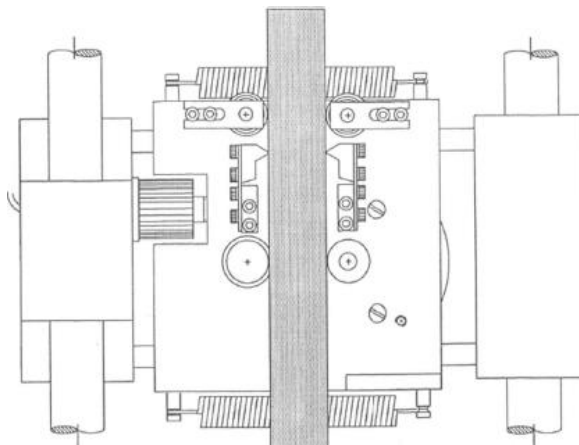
Tensile testing equipment at DTU-MEK section for Manufacturing Engineering. The material specimen is the grey rectangle in the centre [34]
